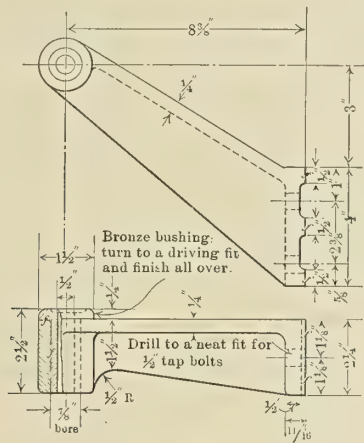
LOWER GUIDE FOR L. P. ENGINE. MAKE ONE OF CAST IRON.
